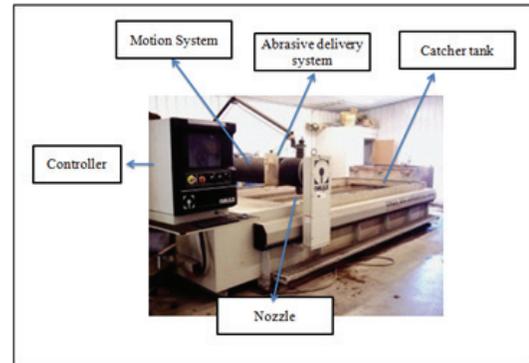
Pictorial view of OMAX 80160 jet machining centre
